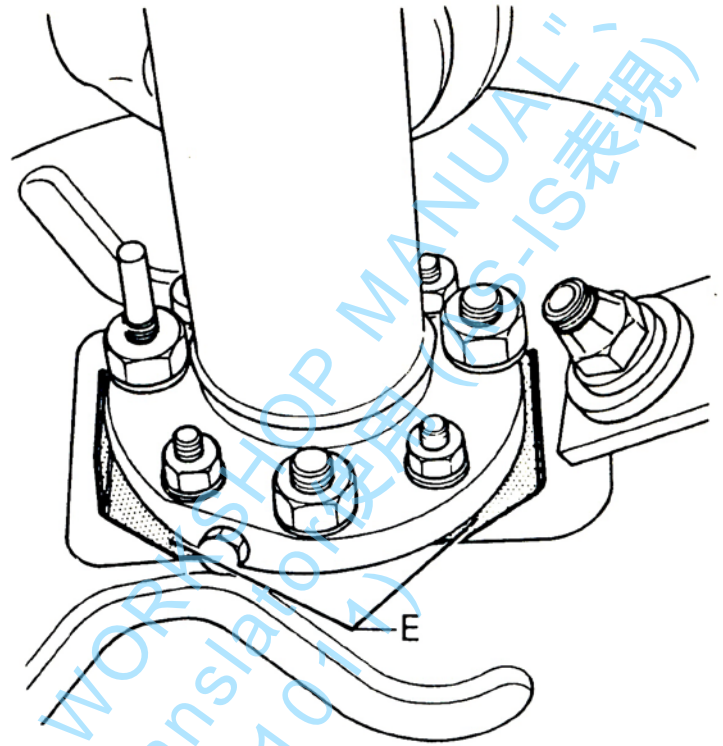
15 Shims for adjusting the caliper bracket on rear wheels
